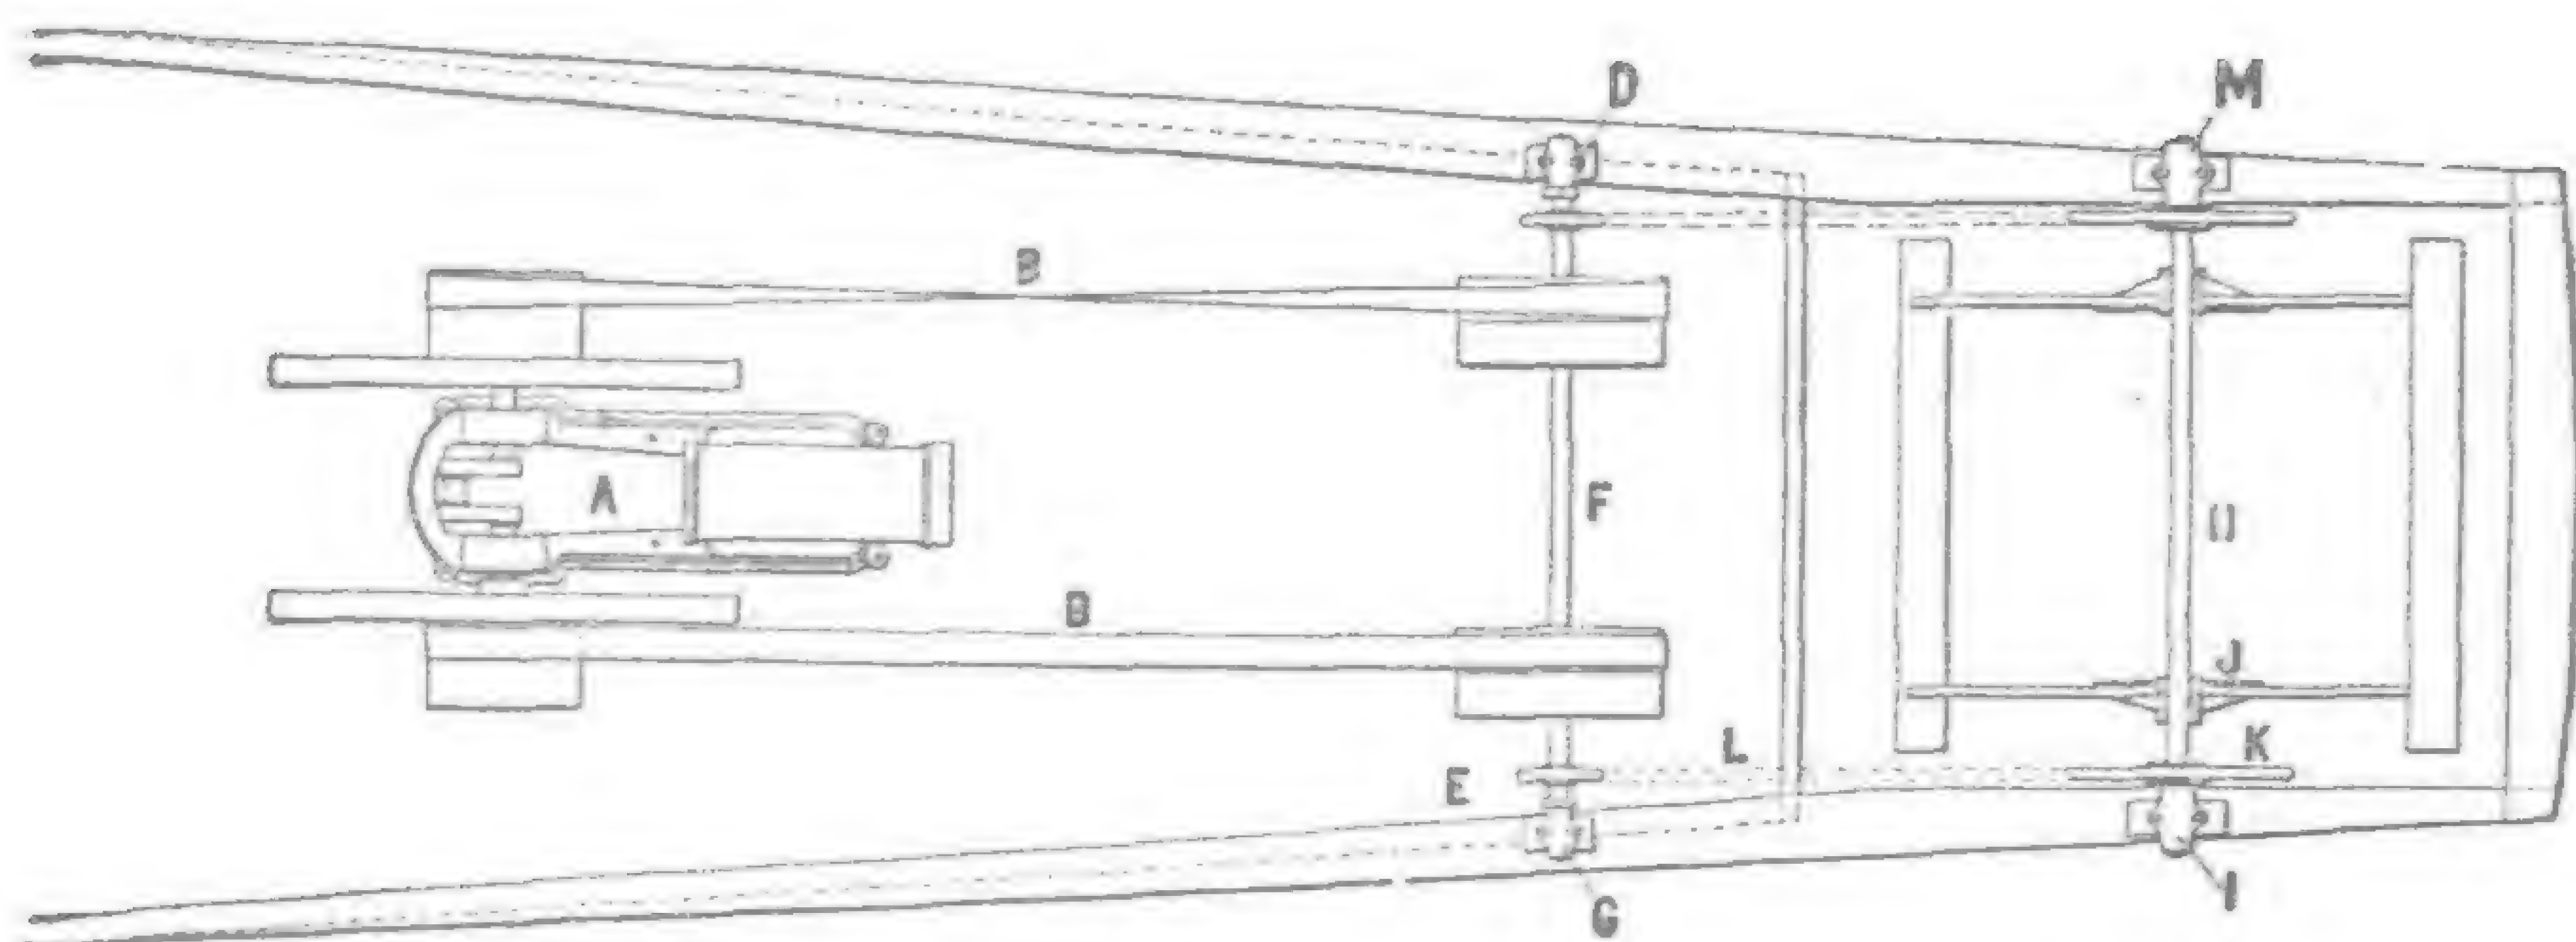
BELT DRIVEN STERN WHEEL DRIVE
